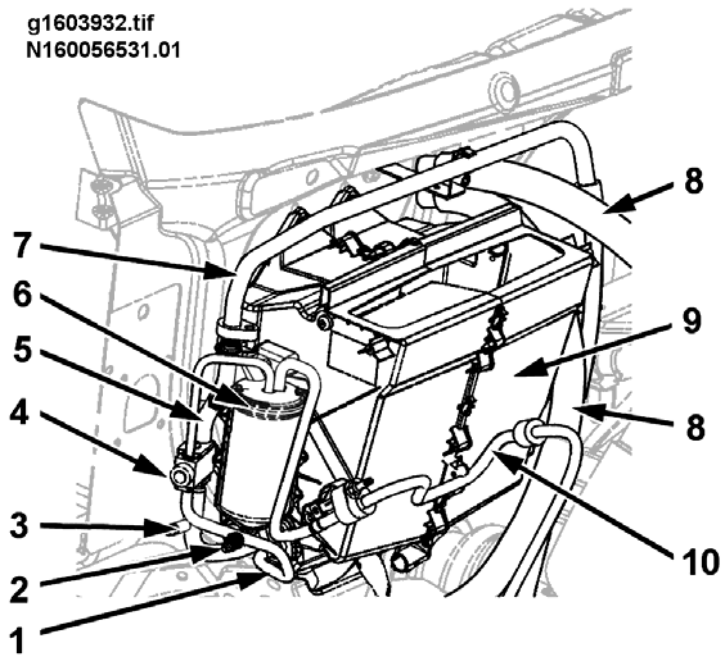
Evaporator Housing (Shown with Cowl Tray Removed)
